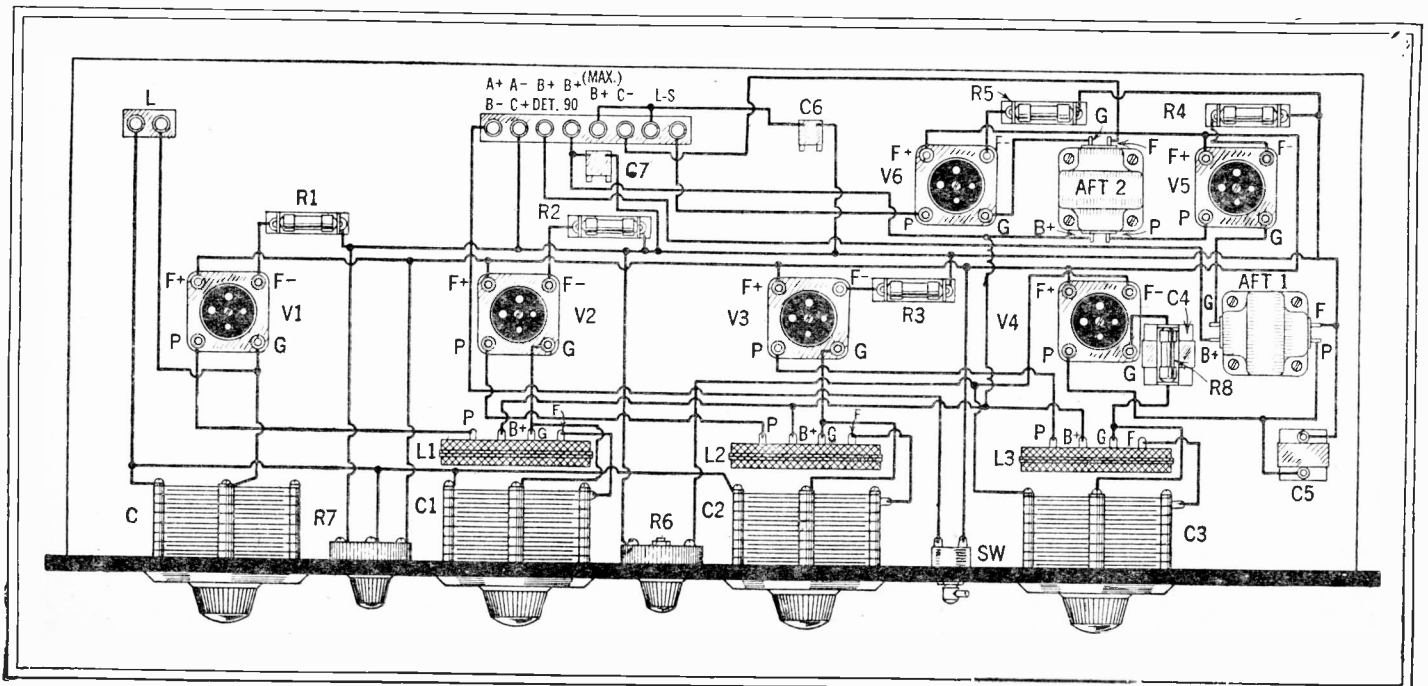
A—Layout for the six-tube set. It should be easy to assemble.
